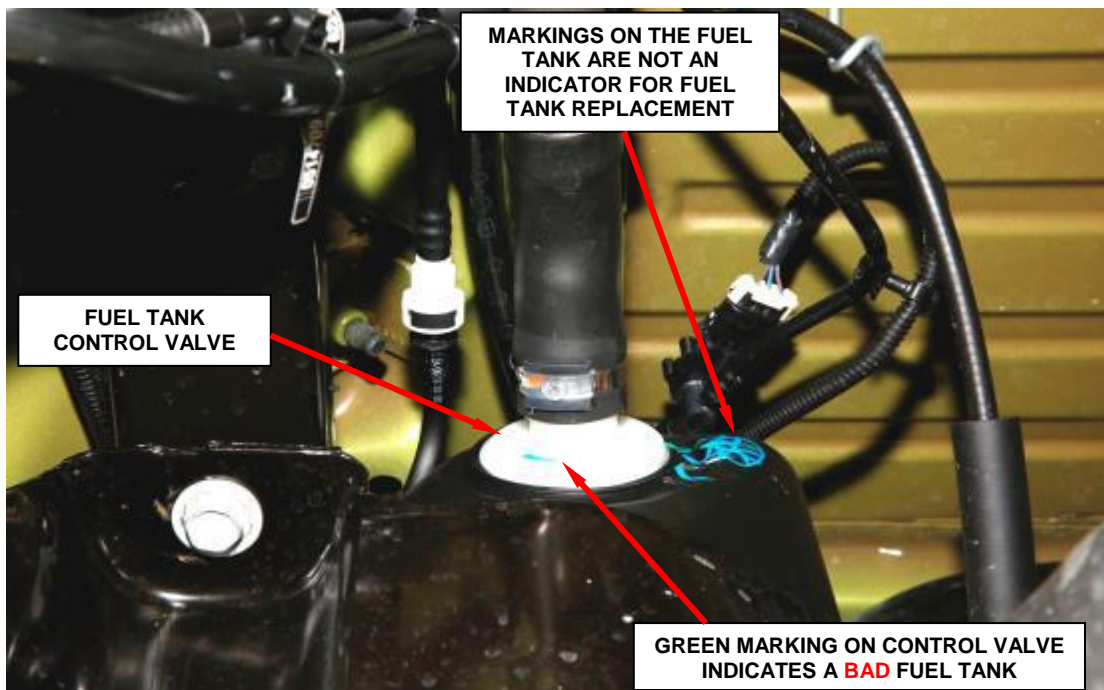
Inspect Fuel Tank Control Valve for Marking
